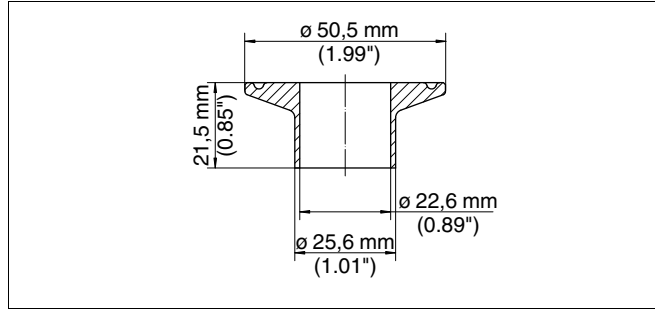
Dimensions welded socket Clamp 1" PN16 DIN 32676, ISO 2852/316L
